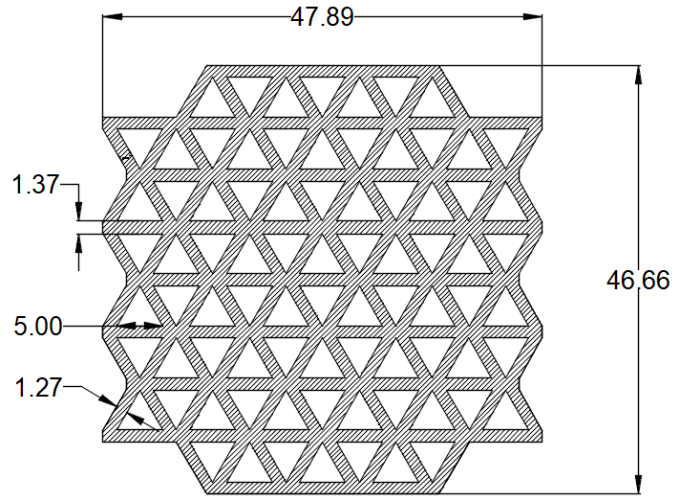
Toucan Beak III cross-section with dimensions in mm.
